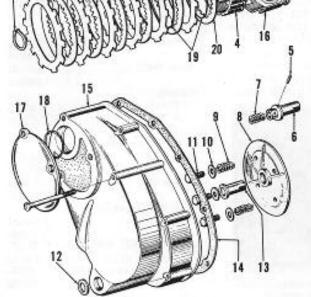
Exploded view of clutch assembly typical of CB and CL models. Six friction discs (2) are used on all models.
